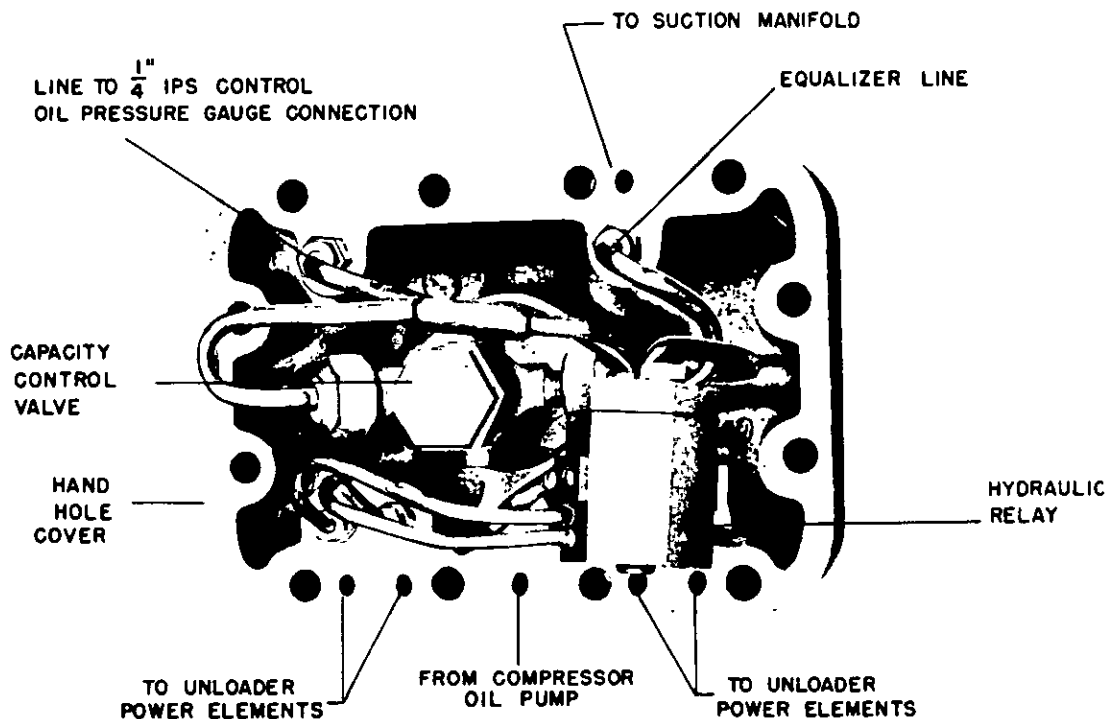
CRANKCASE COVER AND CONTROL ASSEMBLY
